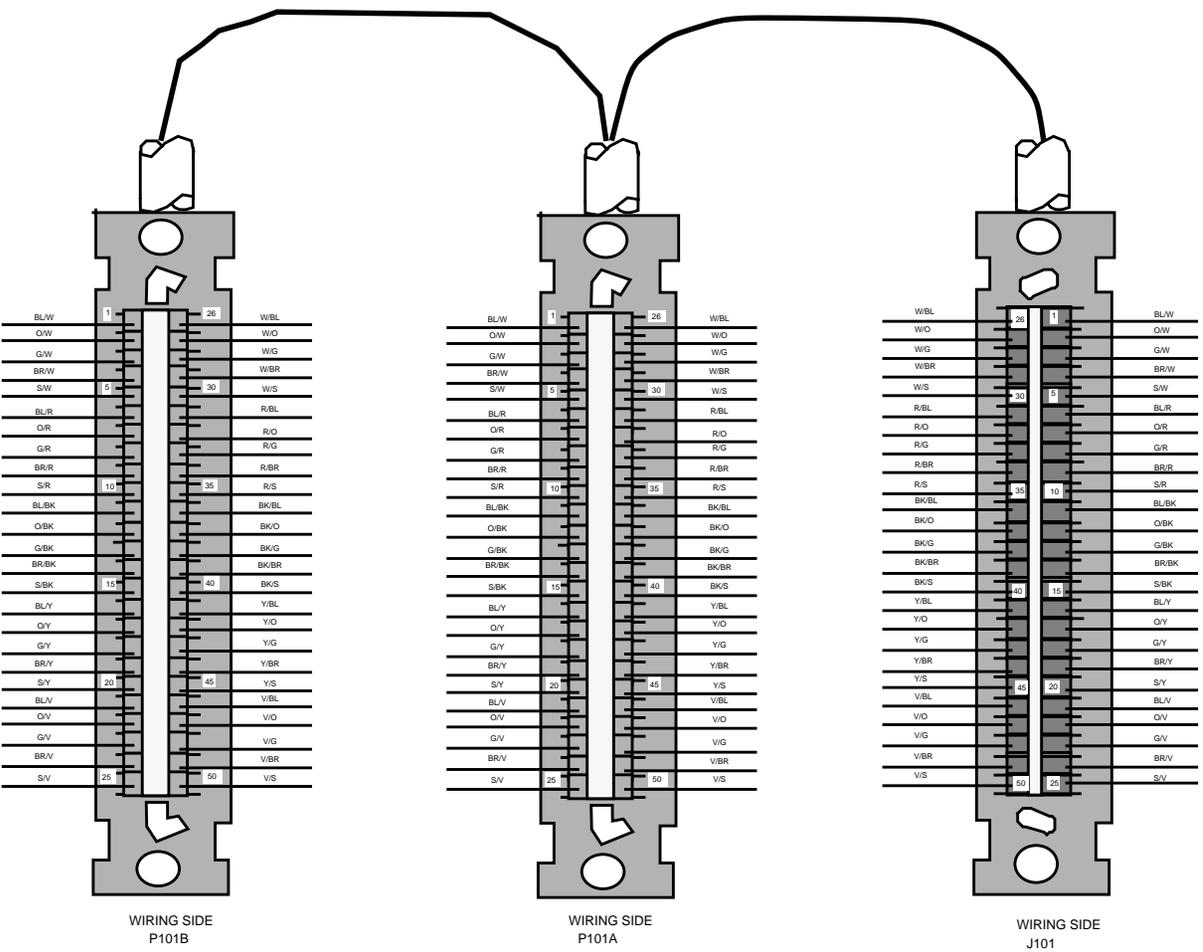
Cable Assembly ED7C723-34 Group 13
